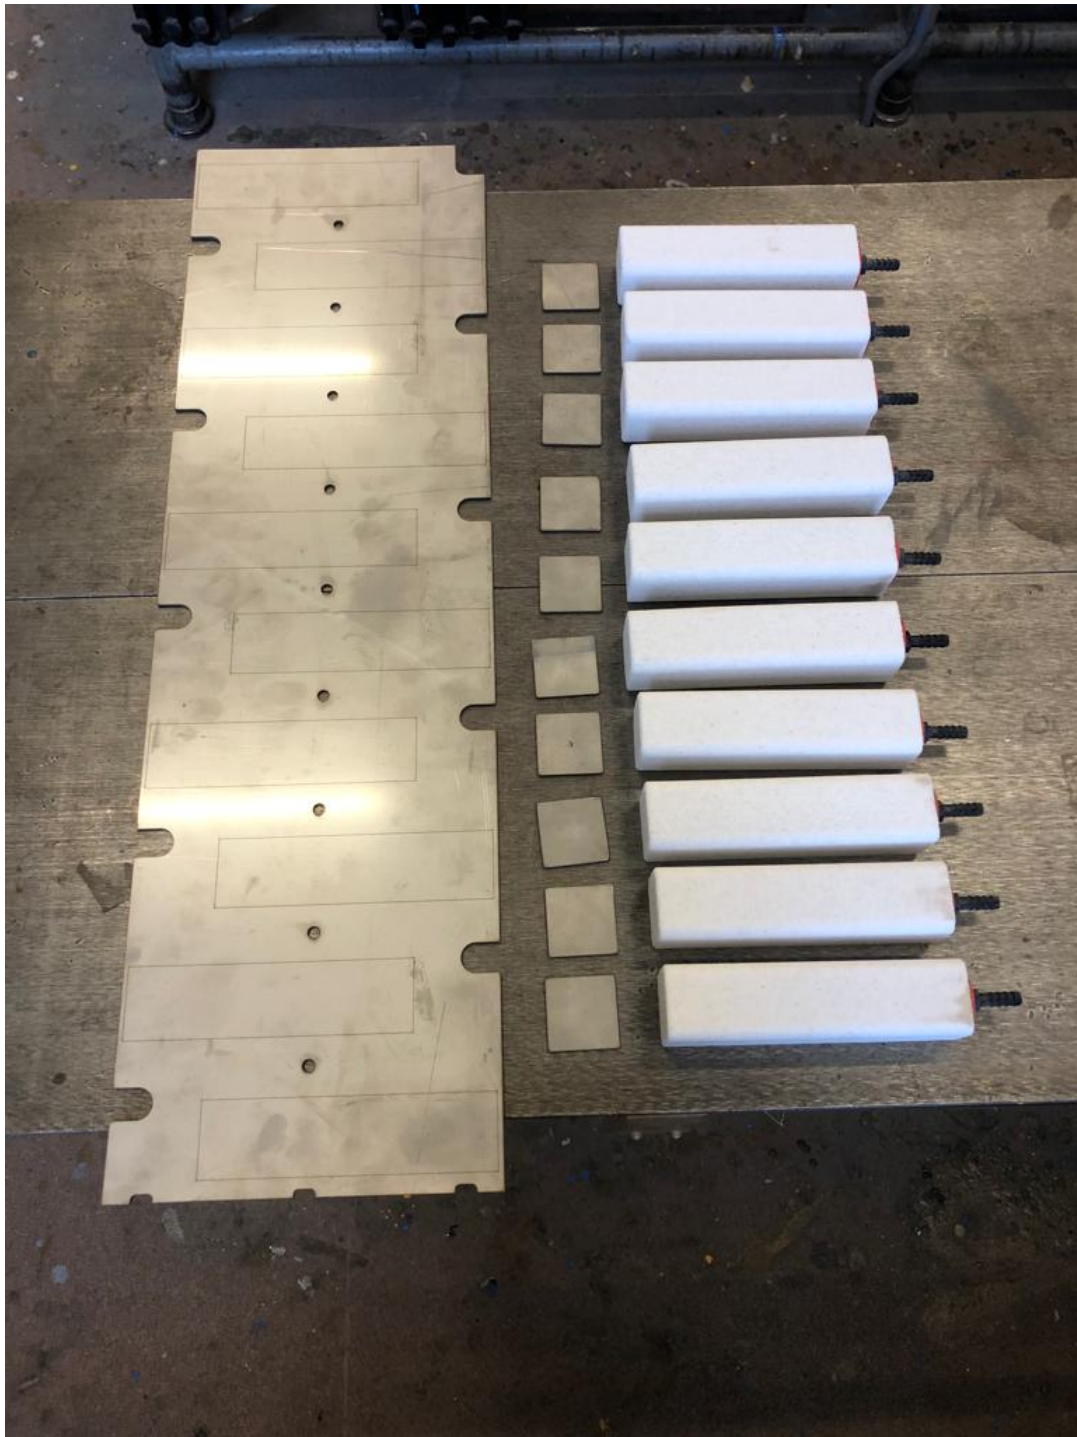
The bottom plate of the structure is made from a 2[mm] thick stainless steel plate. This plate is laser cut in the workshop of 3ME. In the bottom plate, openings for the air hoses (openings at the side of the plate), and openings for the bolts (the holes in the center line of the plate) are also cut with the laser cutter. On the locations where the aeration stones need to be, a thin line is lasered in to the plate, so the installation will be more accurate. Besides the bottom plate, also ten 35[mm]x35[mm] plates are cut at the same time, these small plates will be glued to the aeration stones to prevent air from leaking from the side of the stones.
